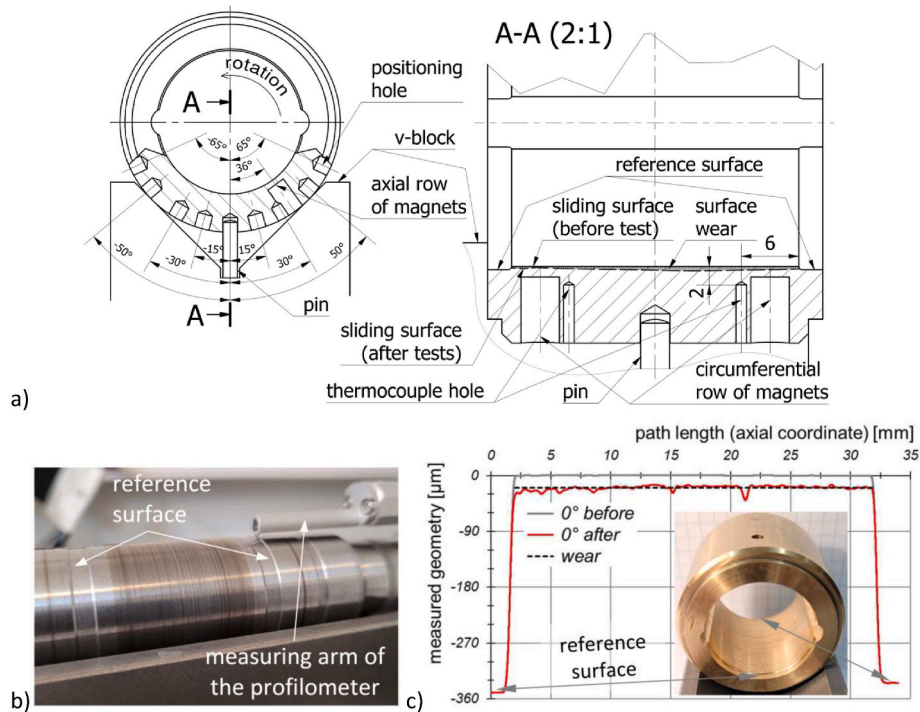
Sliding surface measurements, a) bearing sleeve; b) shaft; c) an example of measured geometry profiles of sliding surface and linear wear assessment.
